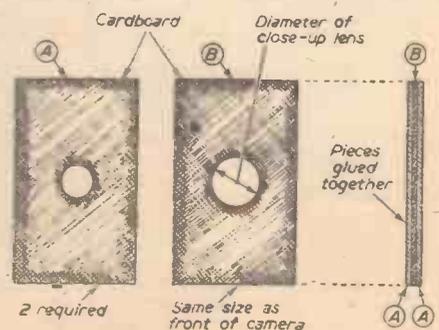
A simple fitment for box cameras shaped from cardboard.
